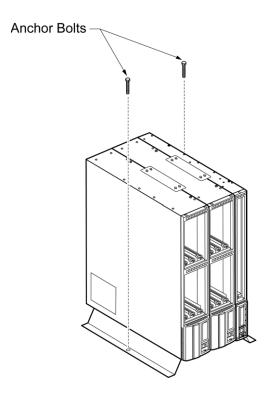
CHS1U-US+CHS2U-USx2 Chassis Configuration
